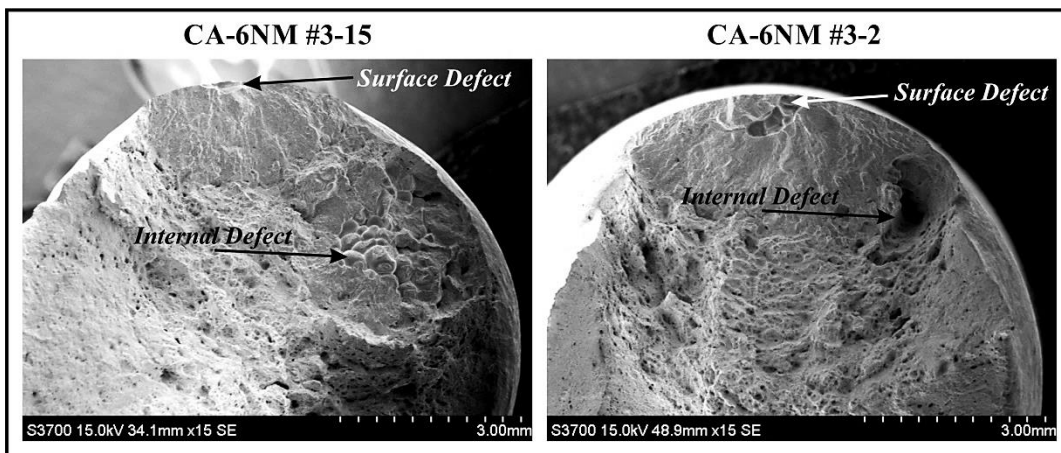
Showing two examples of cast CA-6NM fatigue fracture surface containing a large internal porosity and a relatively small surface porosity
